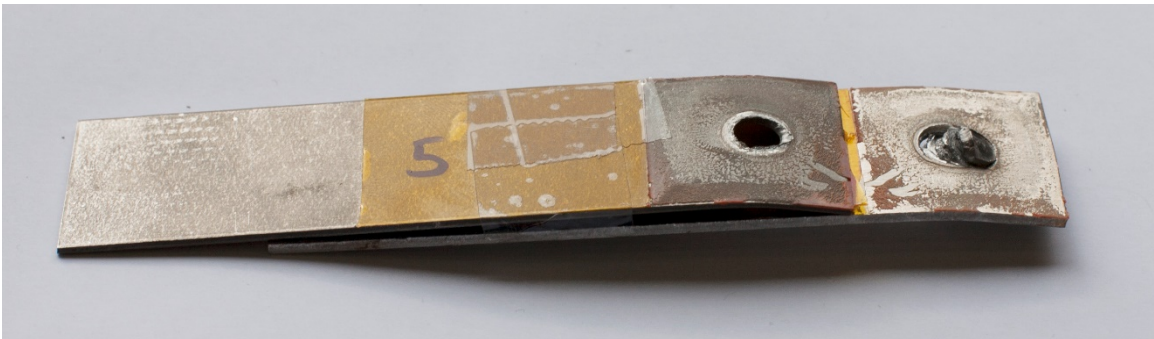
Hybrid Specimen with DP980 Pull Out – Weld Nugget Still Intact
